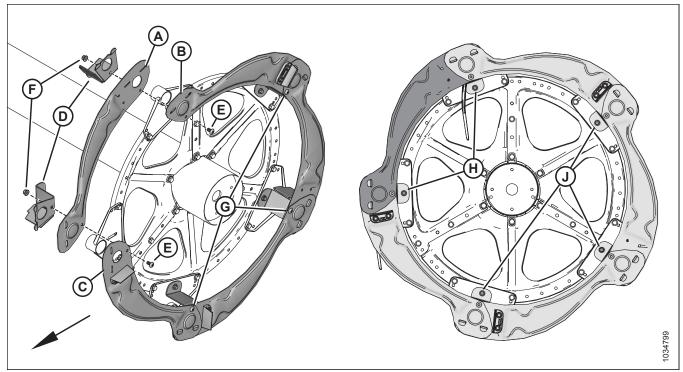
Five-Bat Reel – Partially Assembled Reel Endshields on Reel
